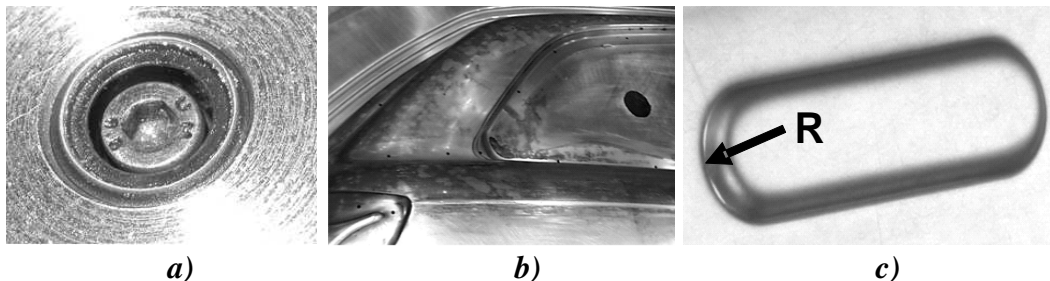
a) bottoming marker, b) blueing print, c) comparison of radii
